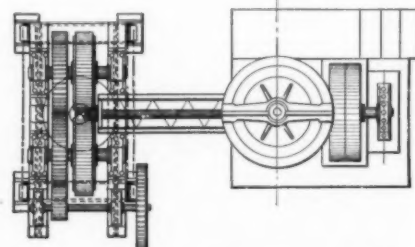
A.—TOP PLAN VIEW OF MACHINE IN FIG. 5.
